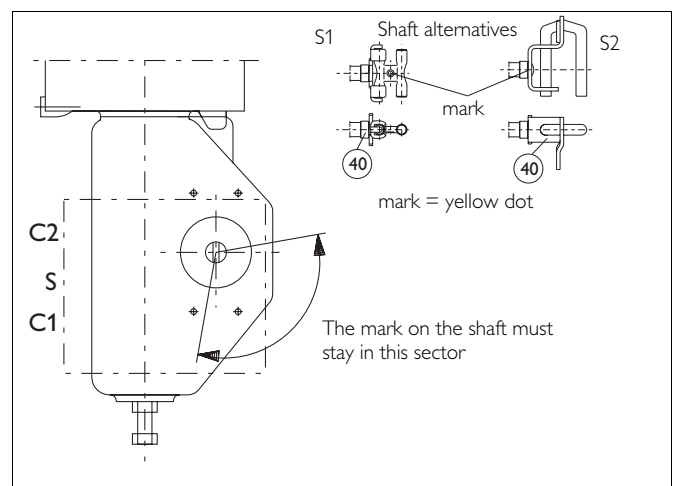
Mounting on Metso Automation actuator with VDI/VDE mounting face
